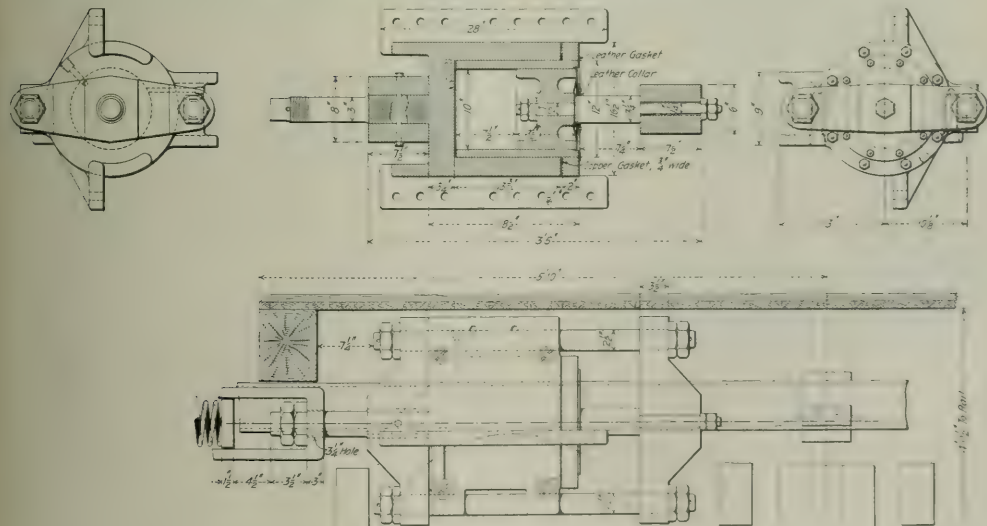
Cylinder and Yoke of Draw-bar Apparatus.
